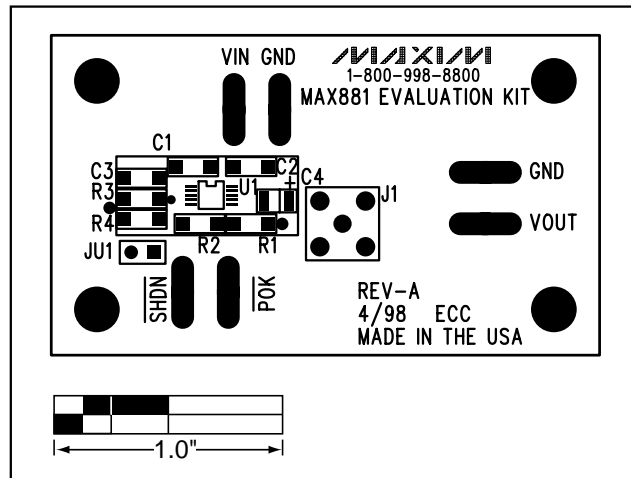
MAX881R EV Kit Component Placement Guide—Component Side
